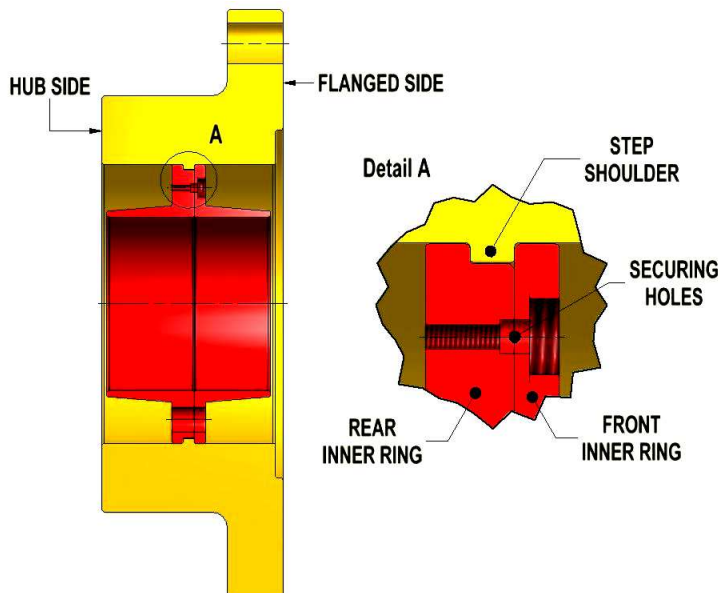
Re-assembling of inner rings of Locking Assembly MAV 7161
